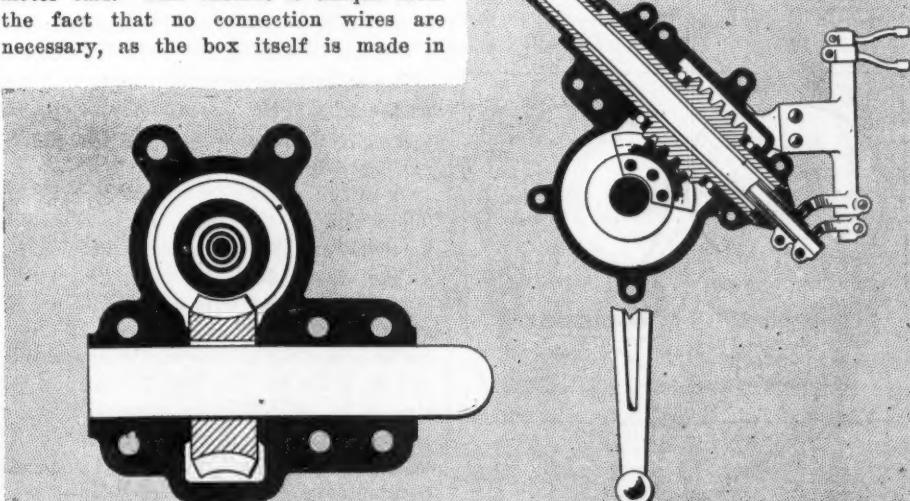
GEMMER 1909 TYPE H STEERING GEAR
